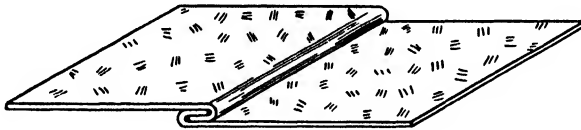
The hook joint is a good method of joining pieces of sheet metal. It is strong and it is easily soldered.
